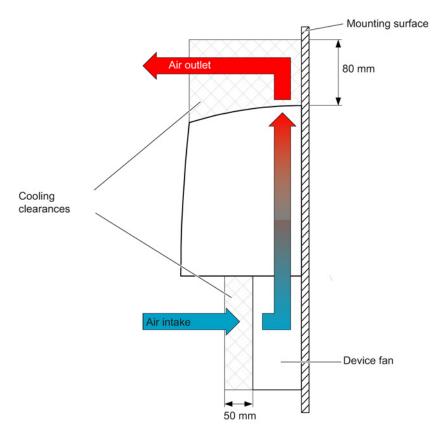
Cooling clearances for 300 mm wide components with internal air cooling with mounted unit fan
